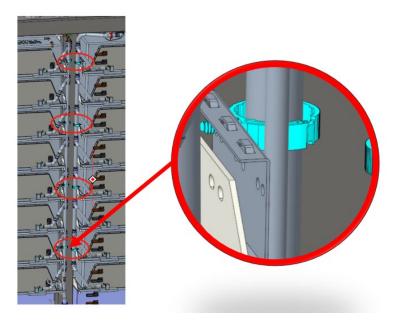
18 Fix Secondary Inlet Pipeline to Sheet Metal Part Inner Hole
